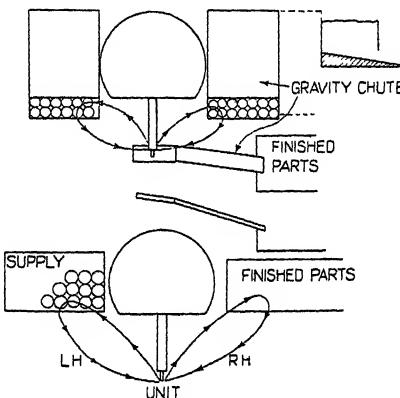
DIAGRAMMATIC LAY-OUT FOR SPOT-WELDING OPERATIONS
